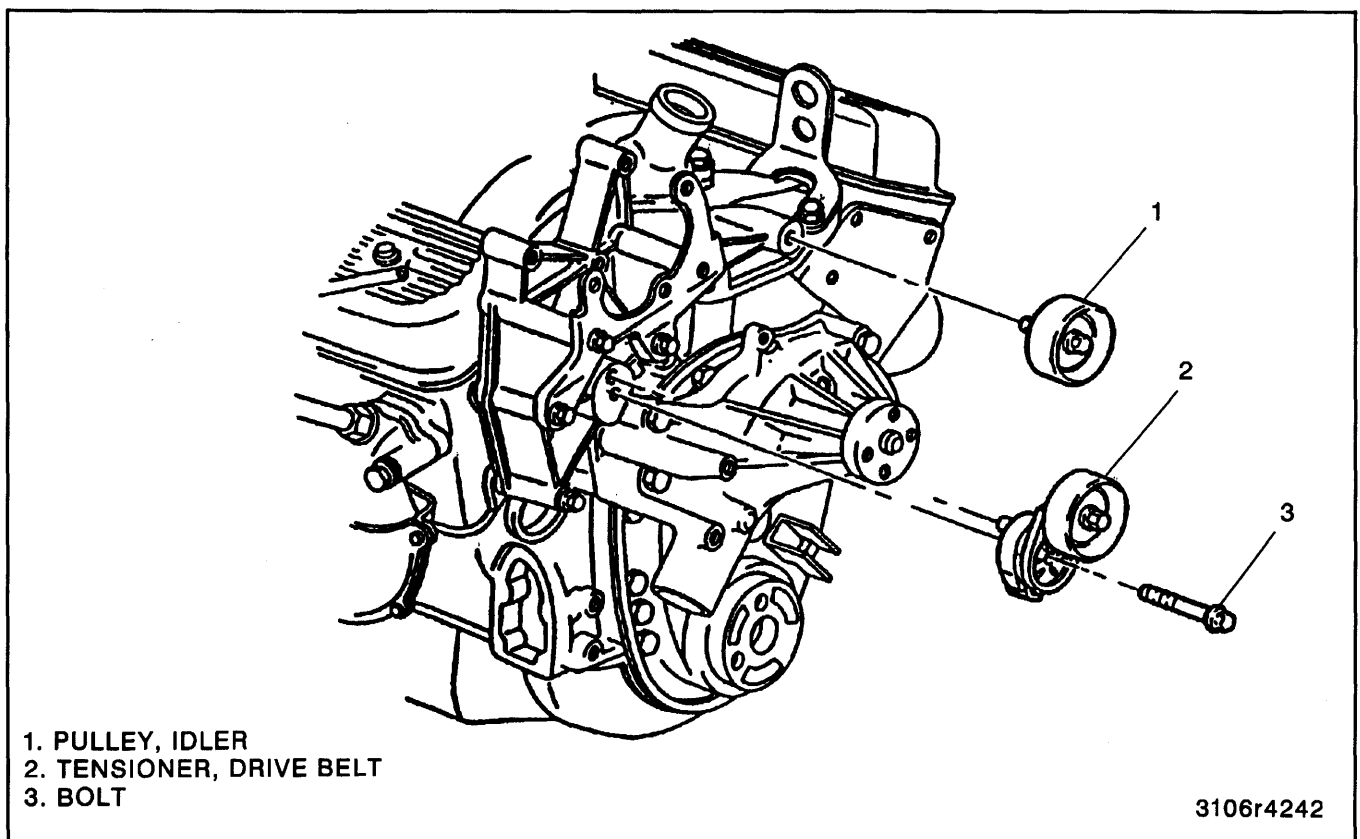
Belt Tensioner Assembly (C/K 2 and 3 with 7.4L Engine and A/C)
